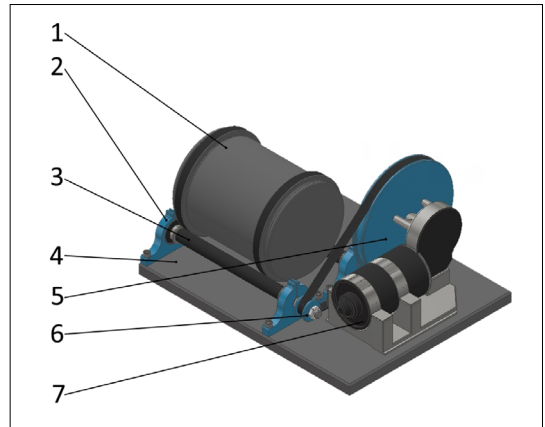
CAD model of the tumbling mill (1 – Drum; 2 – Bearings; 3 – Driven Shaft; 4 – Baseplate; 5 – $\varnothing 90\text{ mm}$ pulley; 6 – $\varnothing 16\text{ mm}$ pulley; 7 – Motor)
